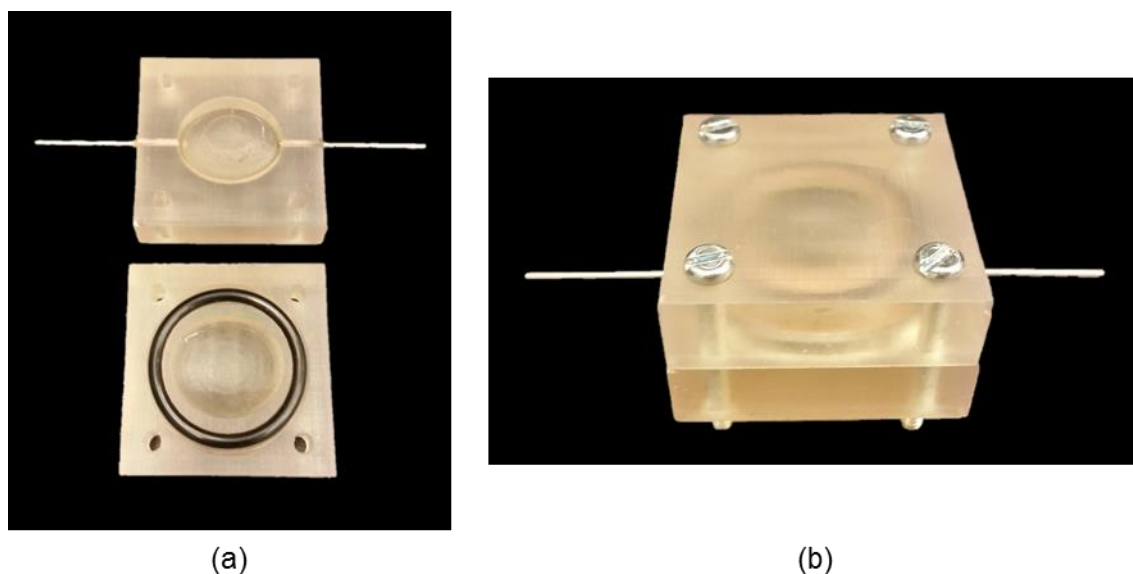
(a) The lower (top) and upper (bottom) parts of the final 3D-printed customised dissolution cell and (b) the successfully assembled prototype with bolts and nuts.
